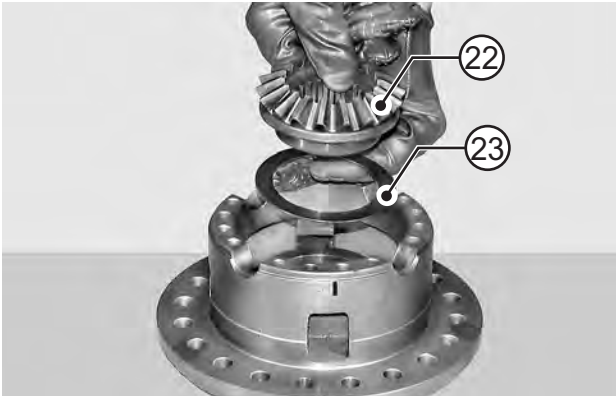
Remove the 2nd planetary gear (22) and shoulder shim (23).
